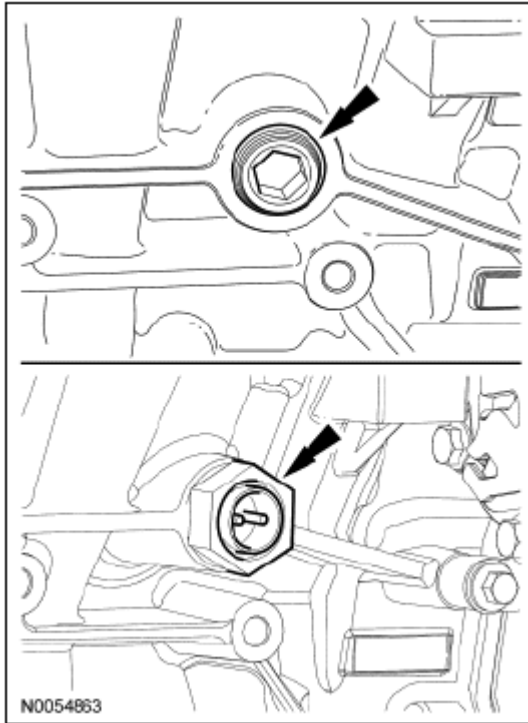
Locating RH Cylinder Block Drain Plug & Block Heater
